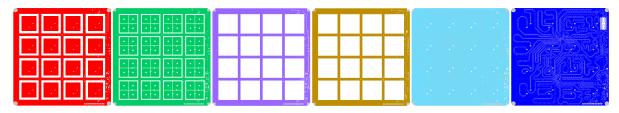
BRD4191A PCB stack-up (Top, Inner 1, Inner 2, Inner 3, Inner 4, Bottom)
